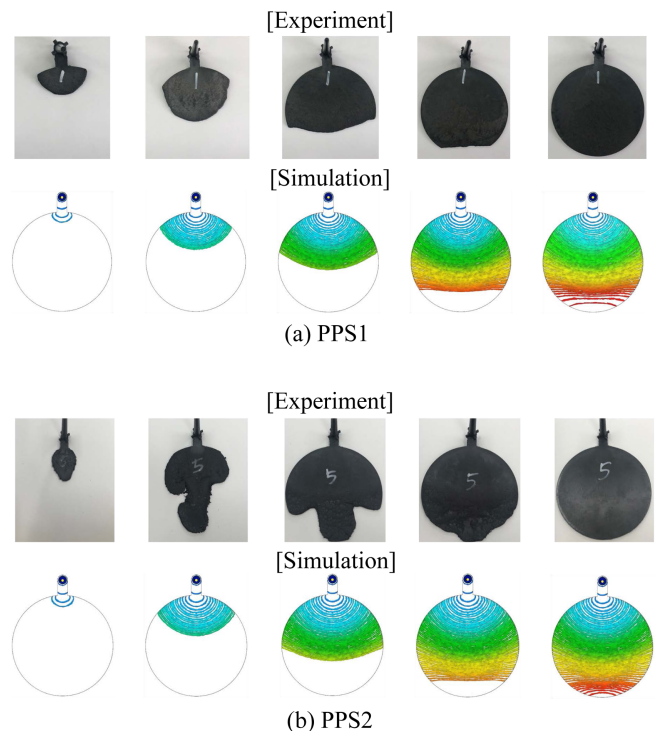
Fill Pattern in injection molding of circular shaped Specimen.
